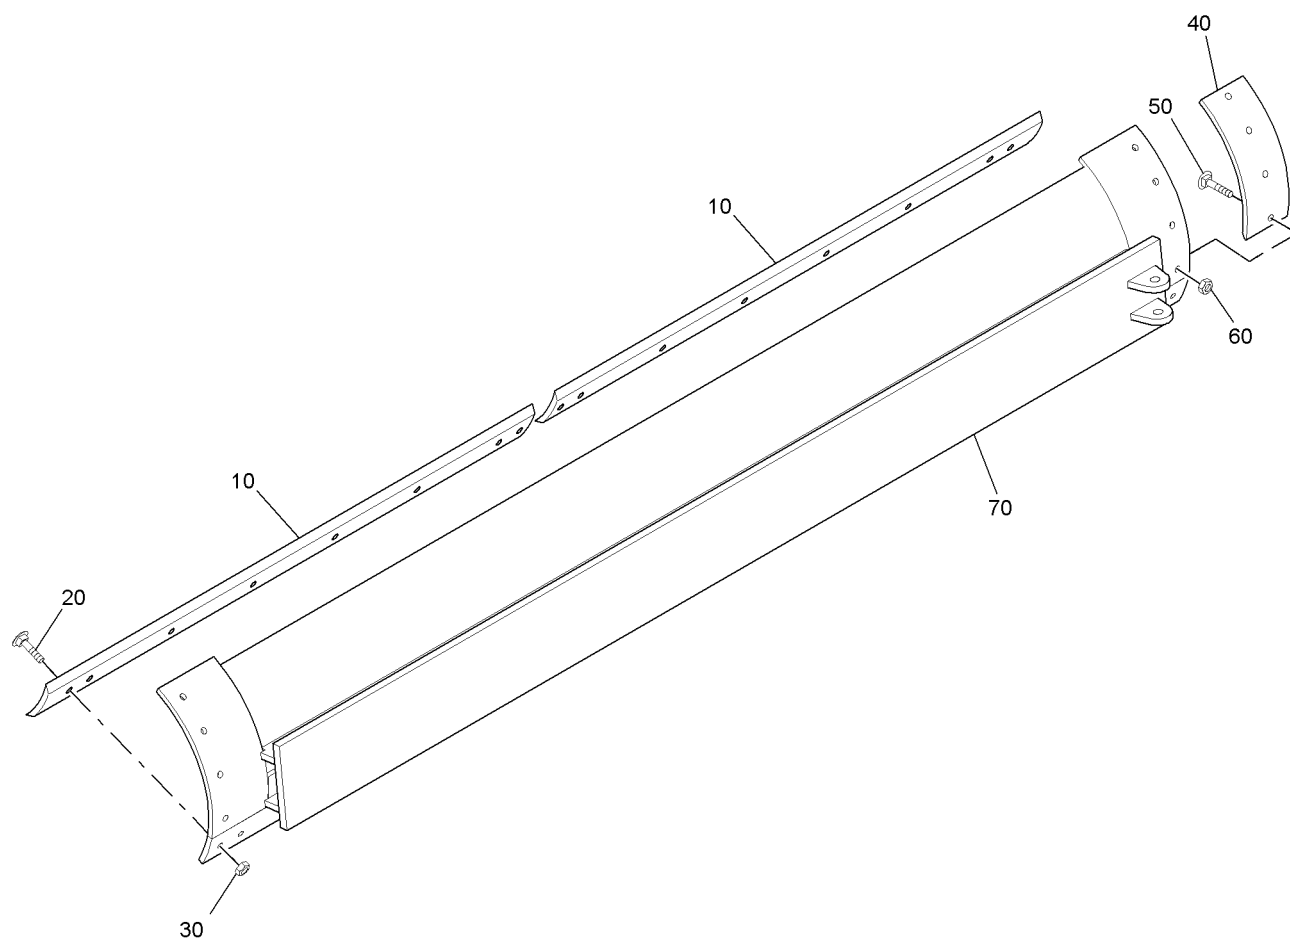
MOLDBOARD AND BLADE ASSEMBLY, 12-FOOT
